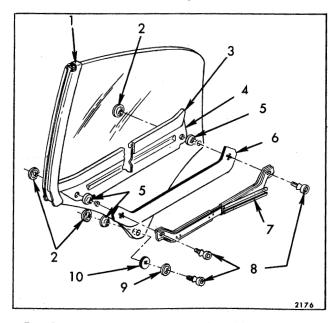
Rear Quarter Window Assembly - Chevrolet "B-47" Style
